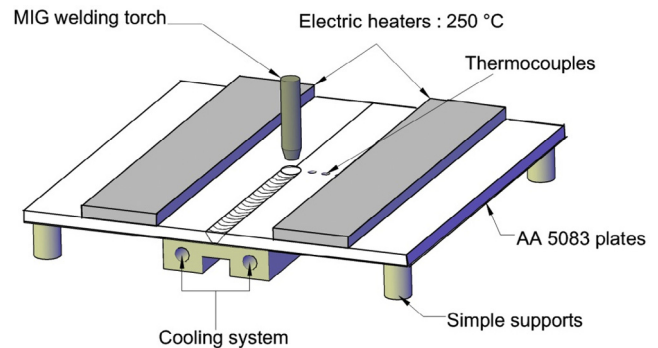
A schematic drawing of static thermal tensioning (STT) treatment applied during welding.
